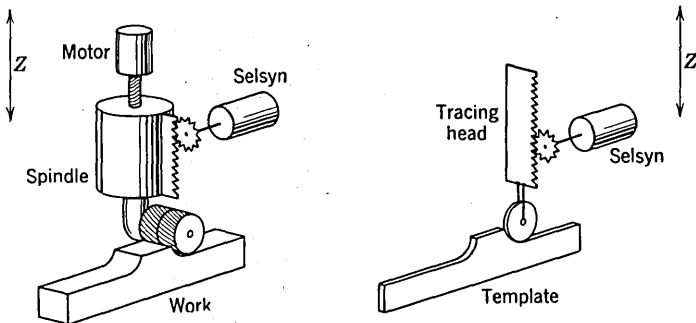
Single-dimensioned control employing selsyn tie between tracing head and spindle motor
